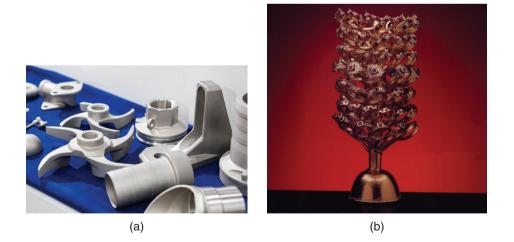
(a) Examples of cast parts. (b) A tree of rings produced through investment casting. *Source:* (a) Shutterstock/Mr.1 (b) Courtesy of Romanoff, Inc.
